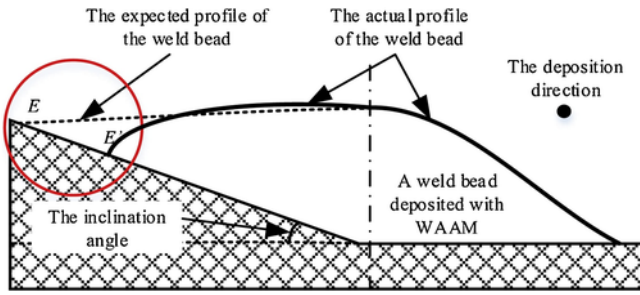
The technical issue caused by machining a groove with a small inclination angle.
